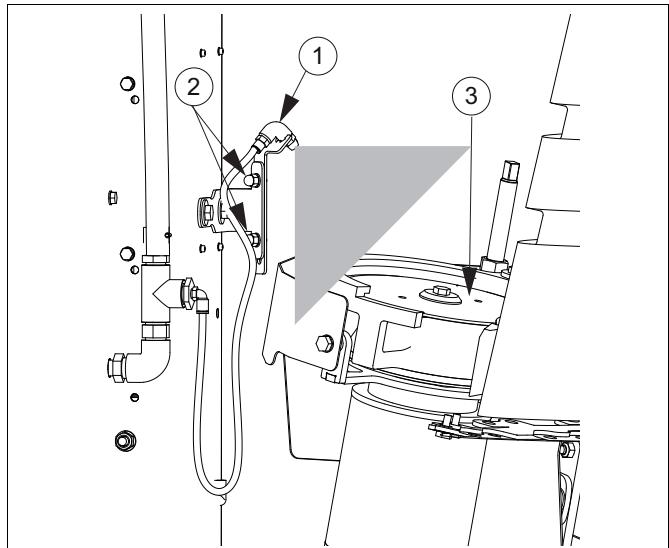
Adjust Neck Skin Cutting Module spray nozzle
